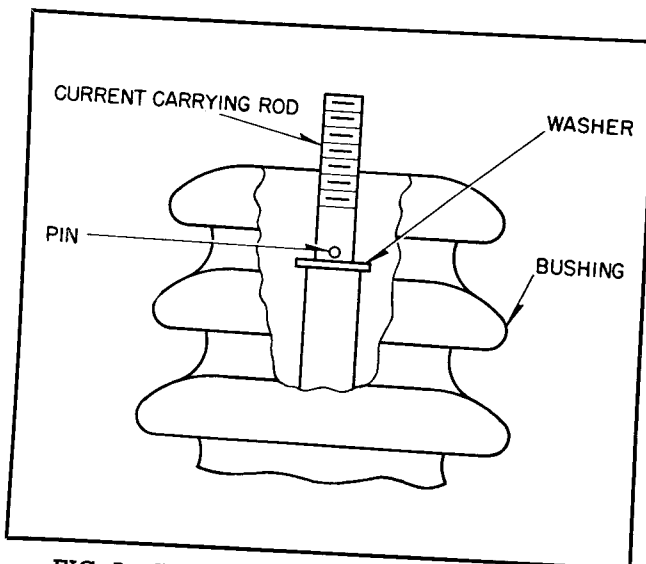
Correct Positioning of Pin and Washer in Bushing Assembly
